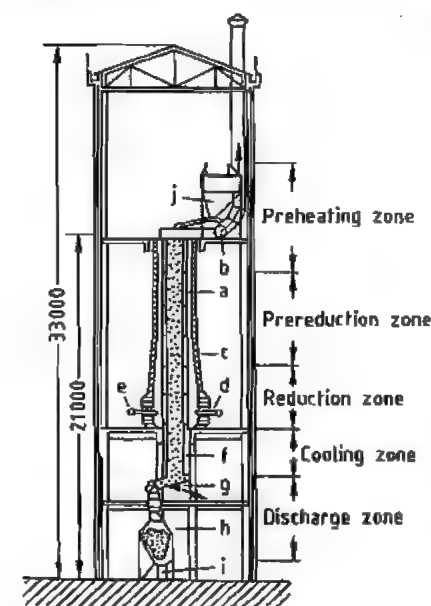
Shaft furnace of the Kinglor-Metor process (dimensions in mm): a) Silicon carbide shaft; b) Gas discharge pipe; c) Fireclay outer wall; d) Burner; e) Gas or oil pipe; f) Air cooling; g) Extruding screw discharge; h) Hopper; i) Sponge iron discharge; j) Charging hopper.
